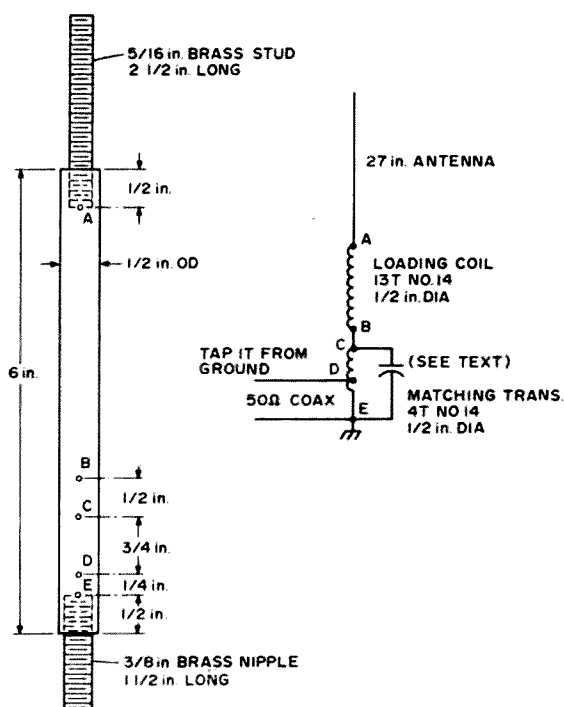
Composite loading coil-matching transformer using single diameter tubing.
